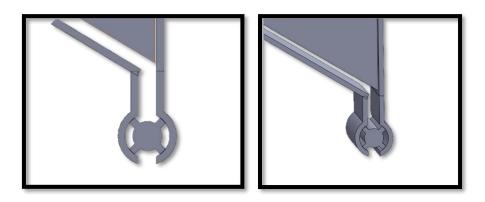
Powder delivery mechanism: Front view (left) & Isometric view (right)
